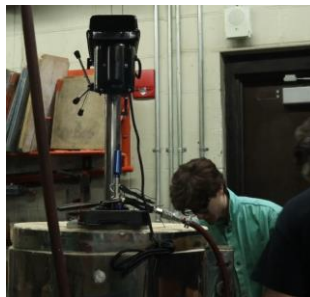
Covering the tempering furnace with a fan blade to distribute uniform heat
